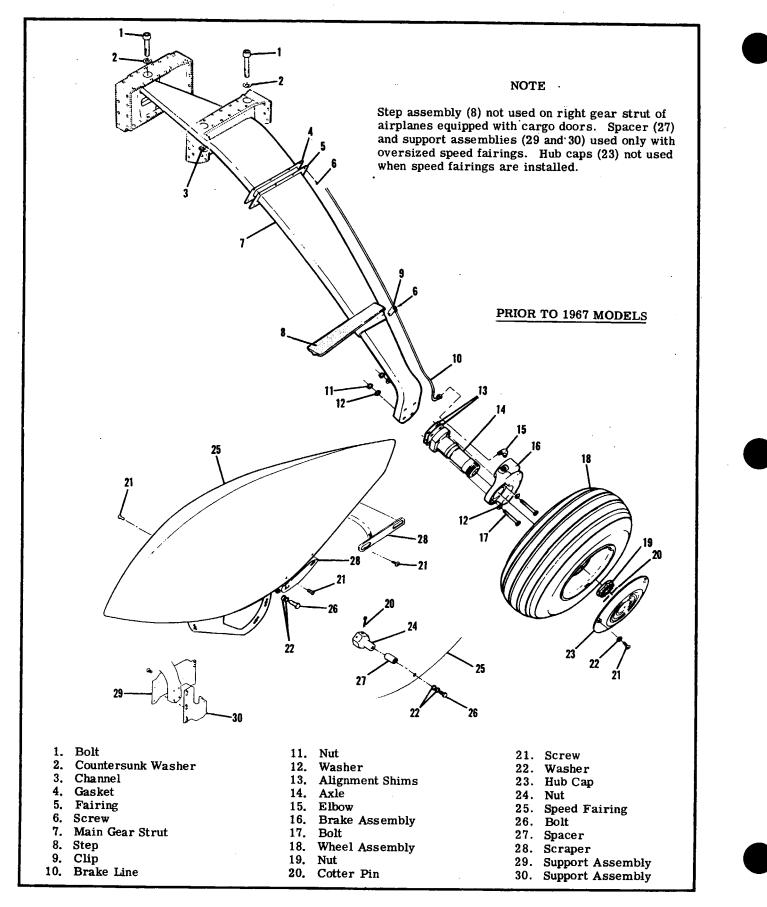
Main Landing Gear (Sheet 1 of 2)
